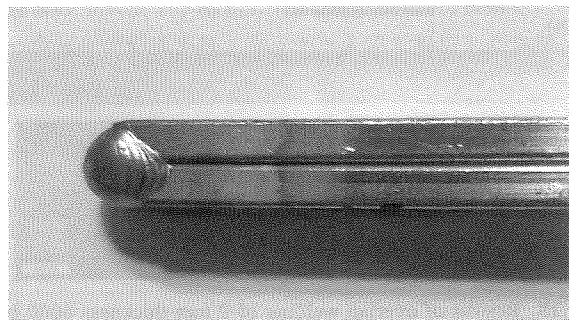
Appearance of hairpin welding with beam mode control.
